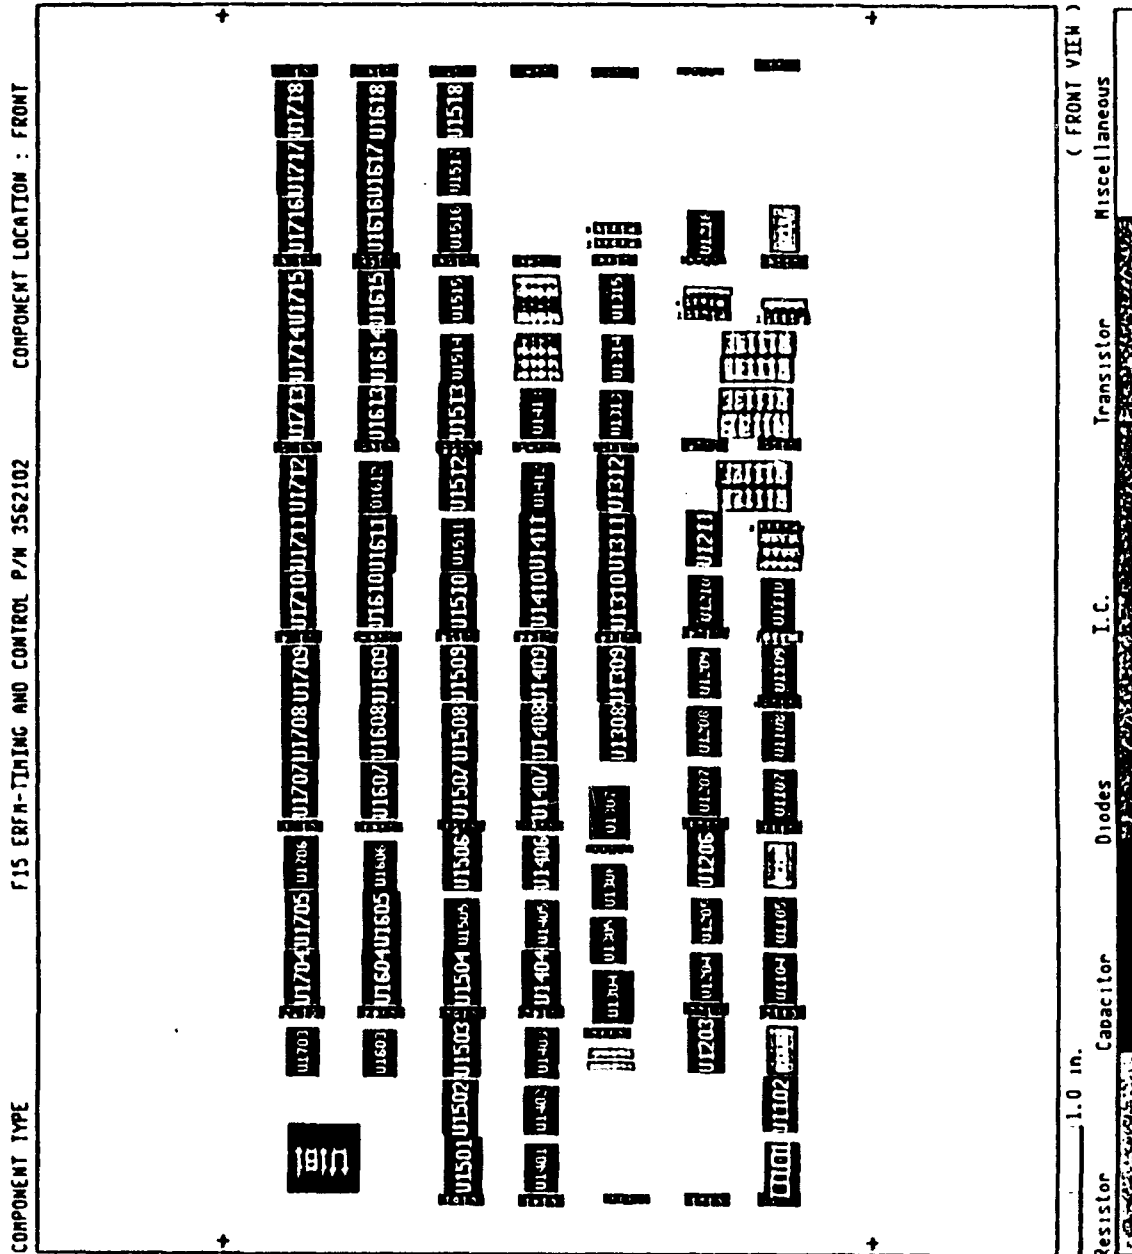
COMPONENT LAYOUT - FRONT SIDE 1
